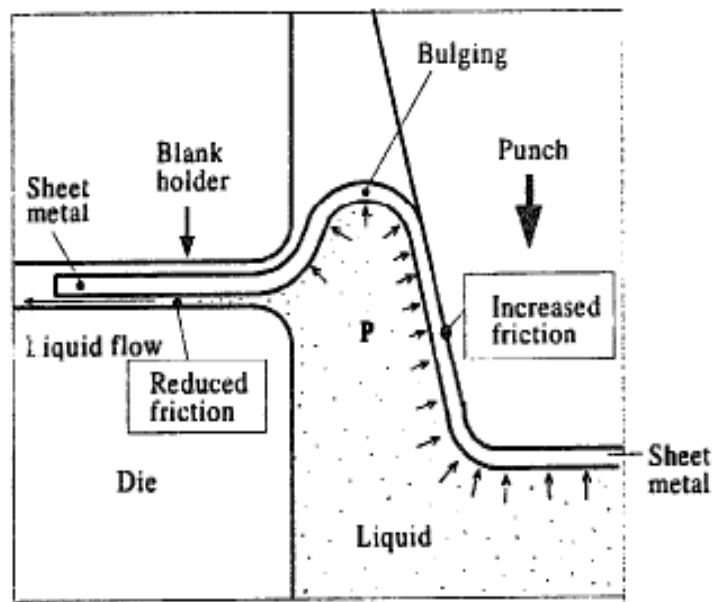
Hydraulic counter pressure deep drawing process [40]
